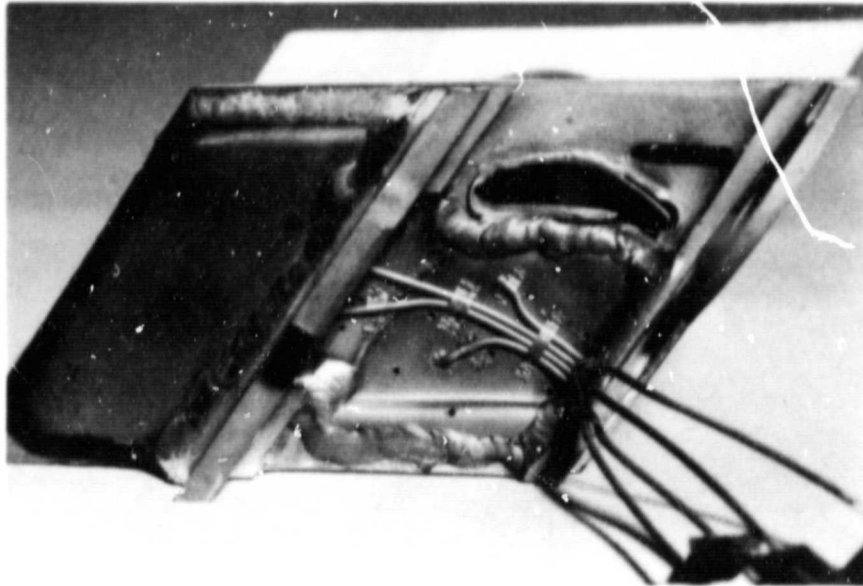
Completed Vane Outer Diameter Platform Assembly for Initial Engine Test - Static pressure sensor installation is shown.
